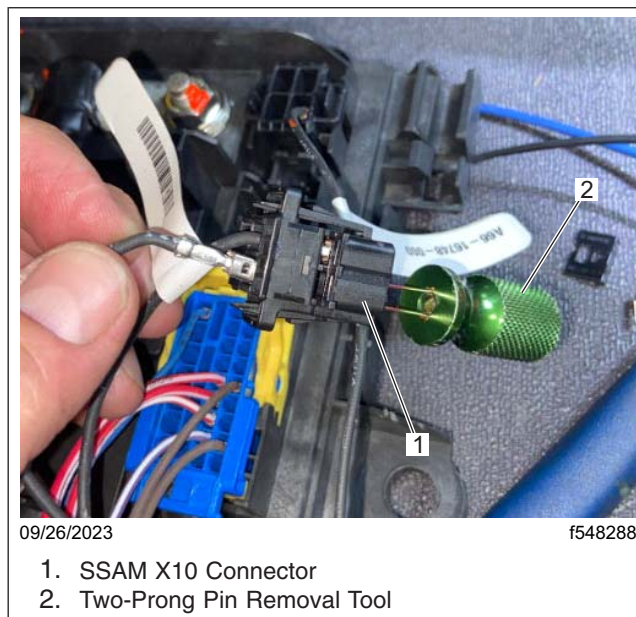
, Removing the Wire Using Two-Prong Pin Removal Tool
